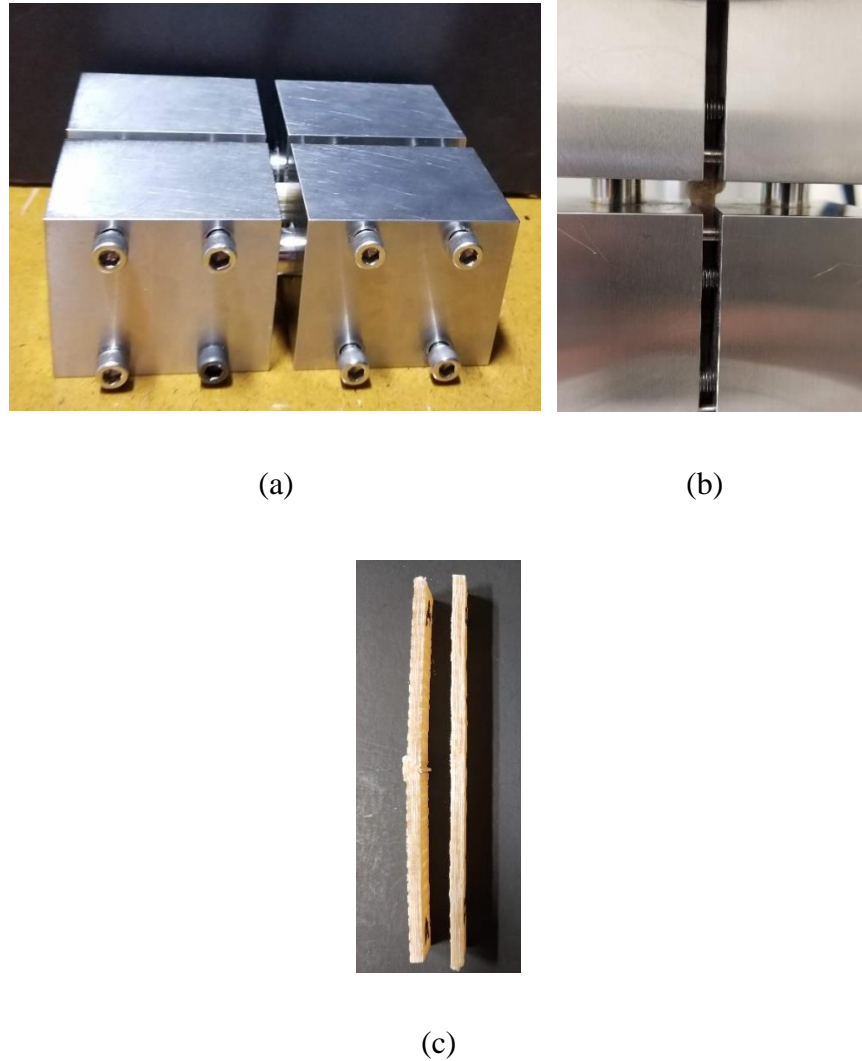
(a) CLC fixture, (b) A compression specimen fixed between CLC fixture (c)
